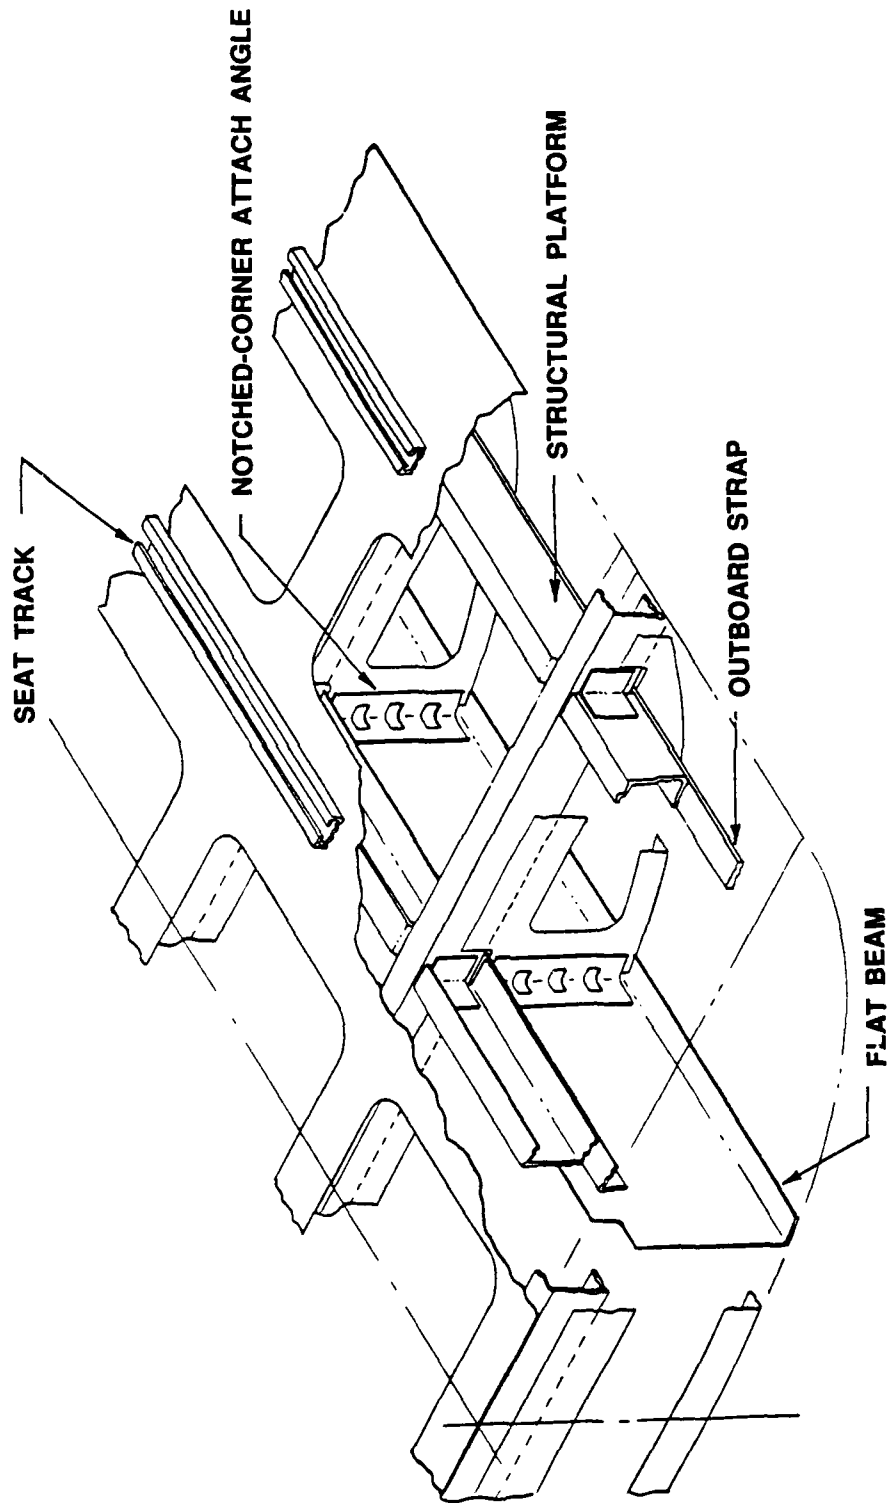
FUSELAGE MODIFICATION DETAIL OF NOTCHED-CORNER STRUCTURE
